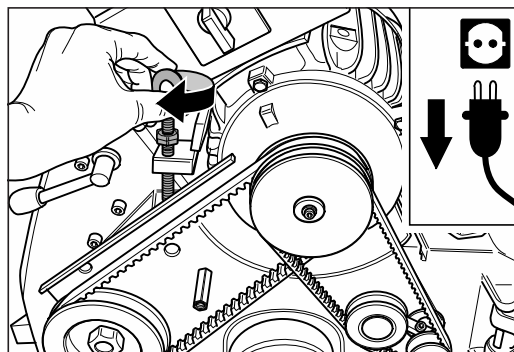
Put the V-belts back on and tighten them with the tensioning bolt at the motor.
